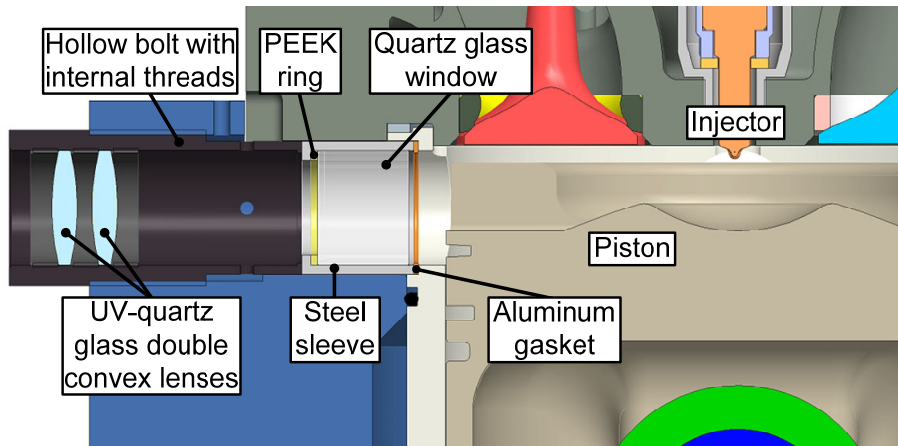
CAD cross section of the optical access used for OH chemiluminescence imaging
